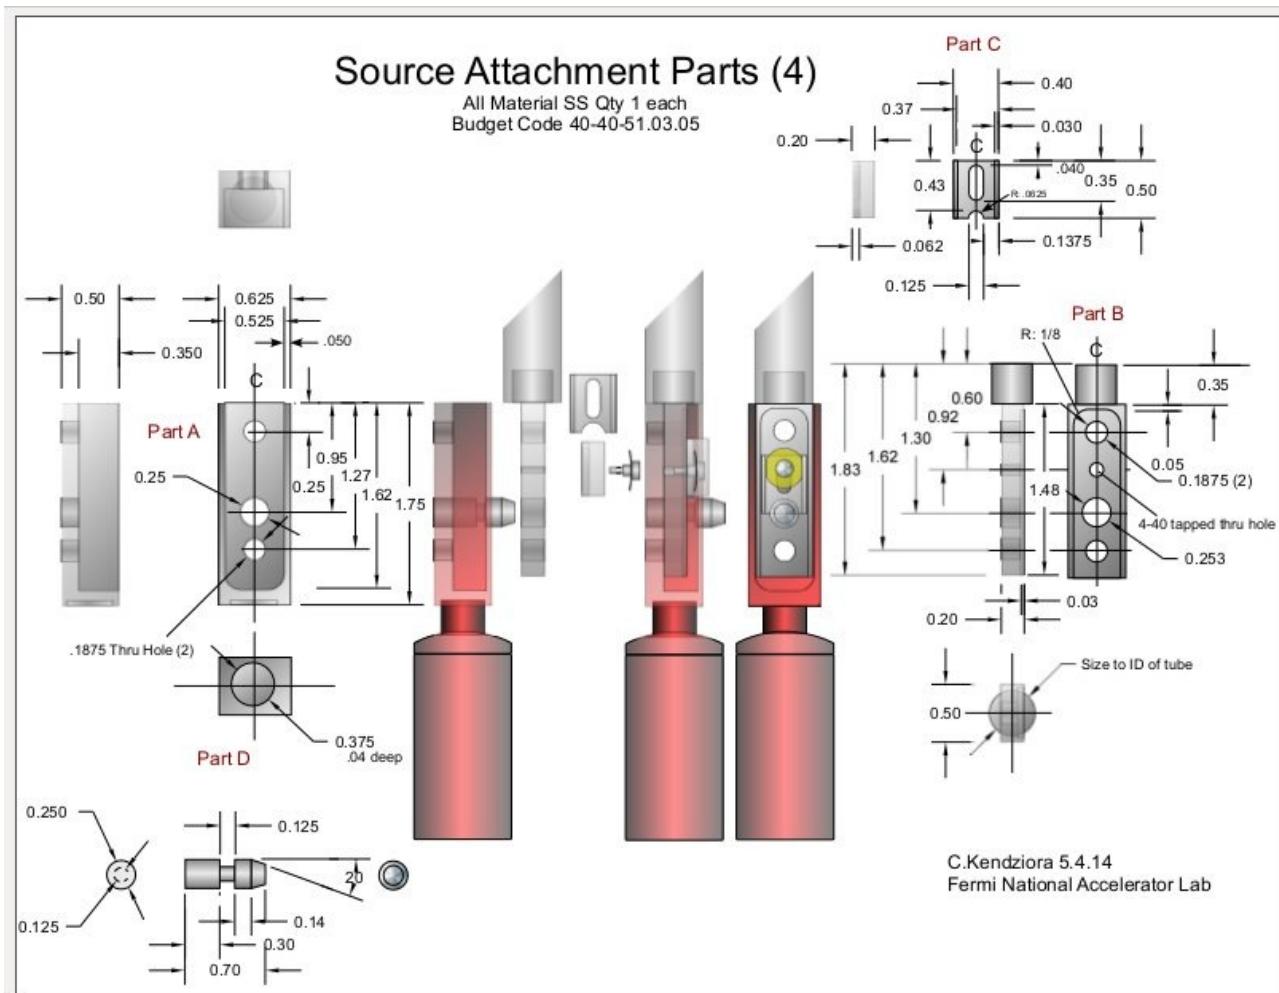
Components of the source attachment mechanism. Central image shows how the pin that holds the source holder slides down and prevents the source from getting loose. The slide pin is locked in place by two push pins shown in Fig. 1 the veto.
